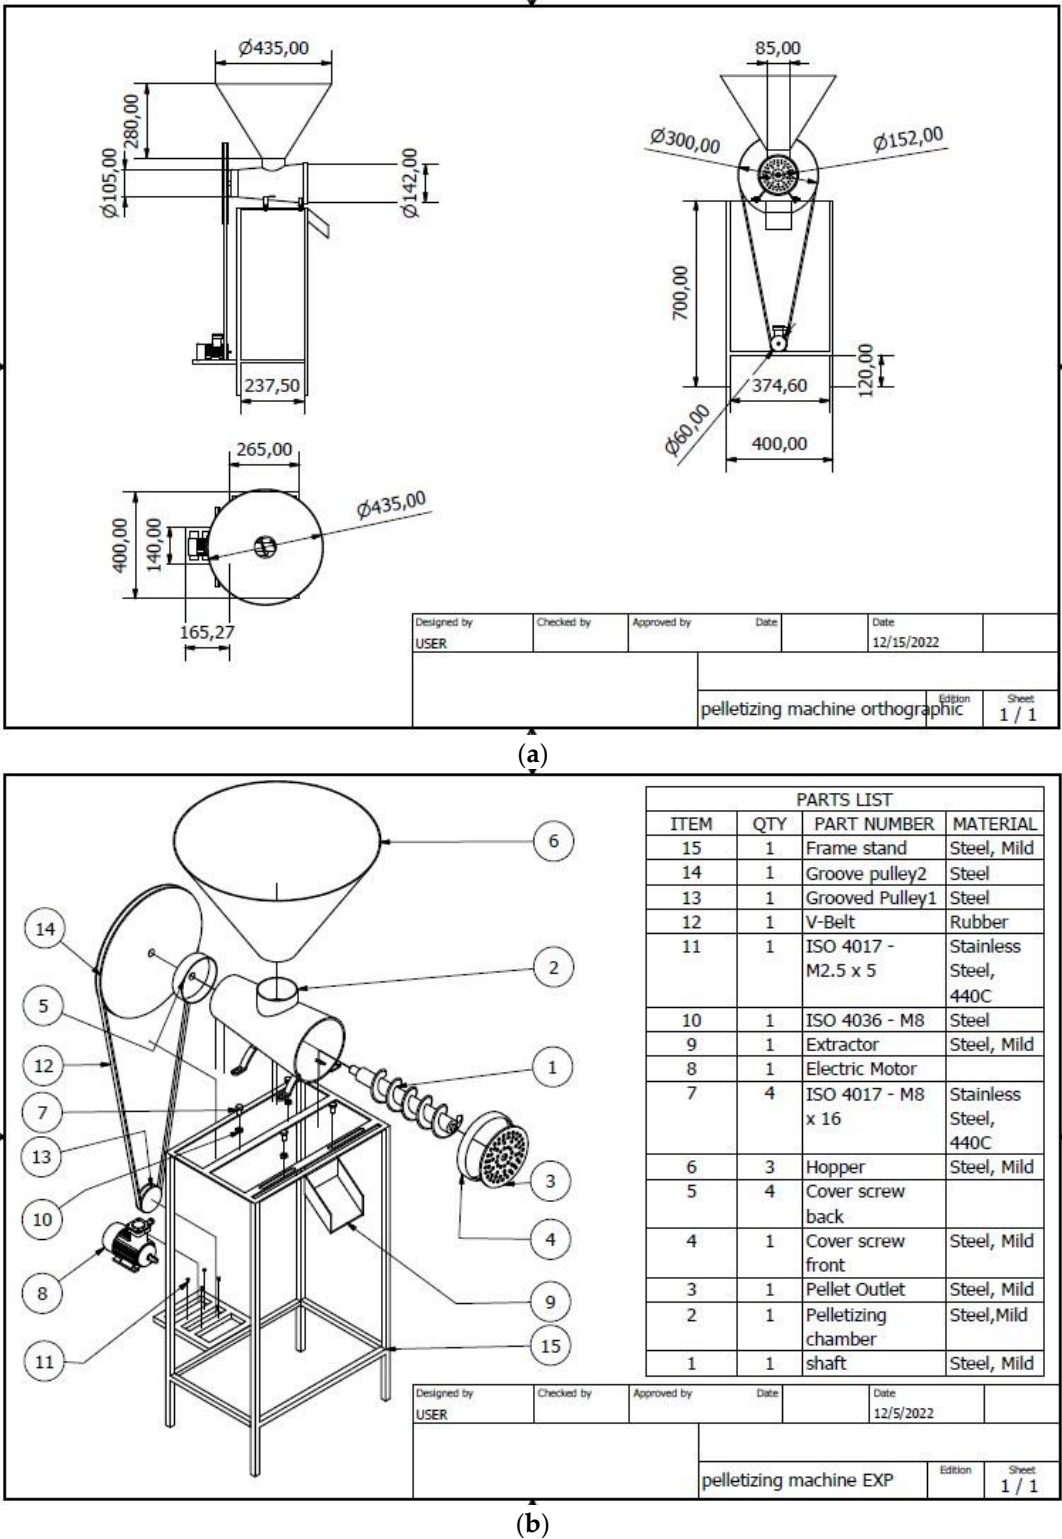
(a) Orthographic (third angle) view of the pelletizing machine. (b) Exploded views of the machine [7].
